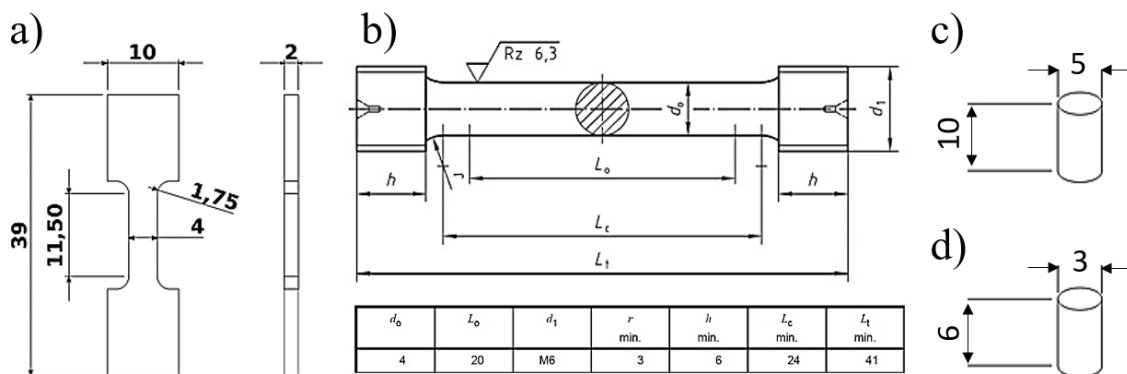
2 – Dimensions of the samples used for tensile and compression tests. In a, b) tensile test and c, d) compression test samples geometries. All the dimensions are represented in millimeters (mm).
